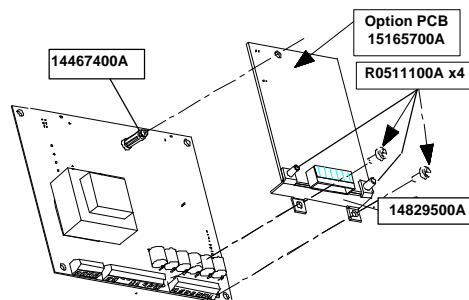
Mounting Modbus Plus Option PCB in Panel Mount Enclosure
